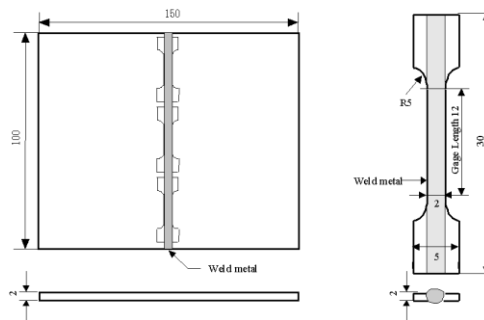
Schematic of tensile test specimen to measure tensile properties of weld metal
